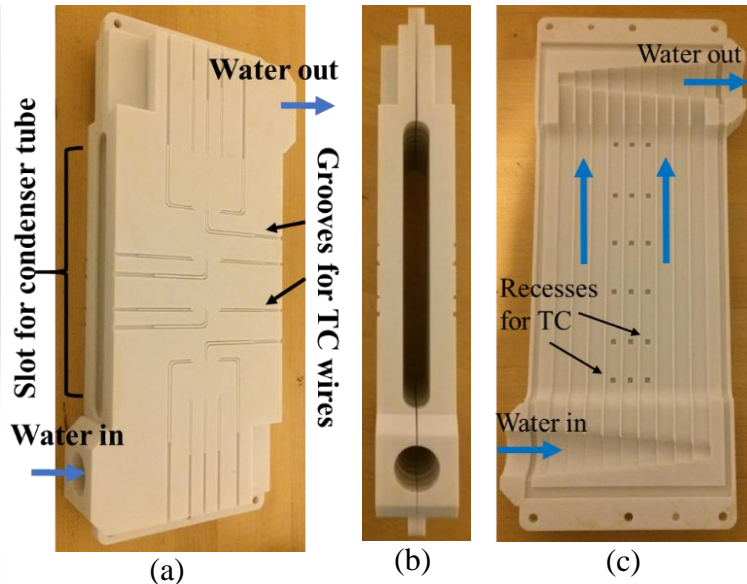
Polycarbonate water jacket, (a) External view of jacket, matching the view in Figure 9.4; (b) End view showing water inlet and space for tube; notches on sides are for thermocouple wires. (c) View of inside one half of the jacket. Recesses for water thermocouples (T_r) can be seen in the middle three channels.
